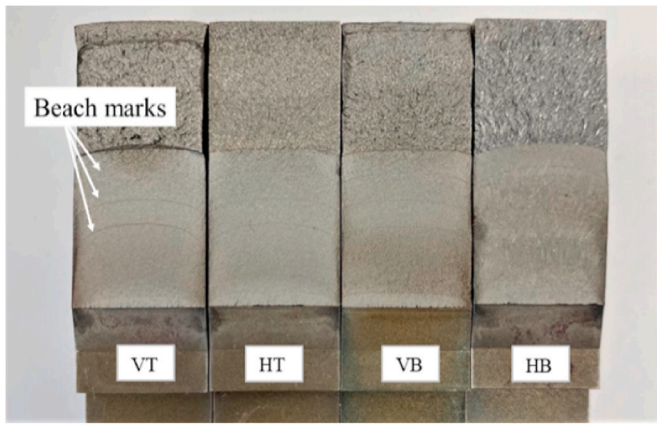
The beach marks on fracture surface of WAAM ER70S-6 C(T) specimens tested in air.
